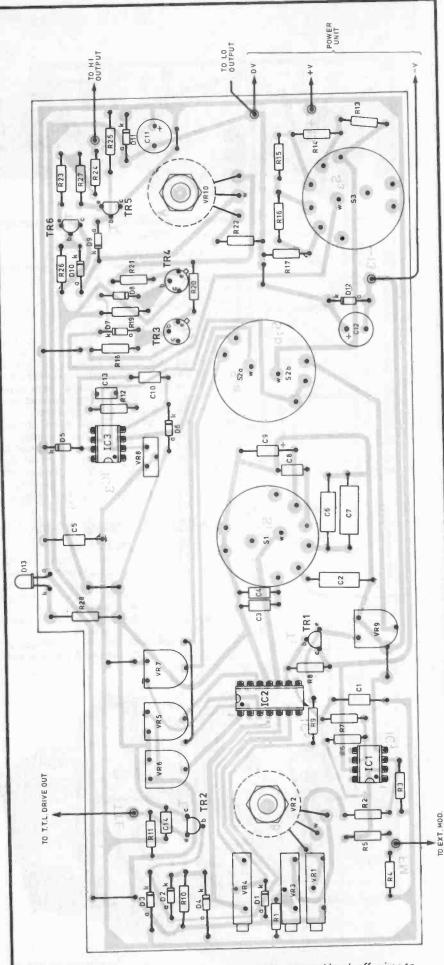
Printed circuit board component layout and lead-off wires to front panel sockets and power supply board. Indicator I.e.d. D13 is fitted after assembly to the panel.
